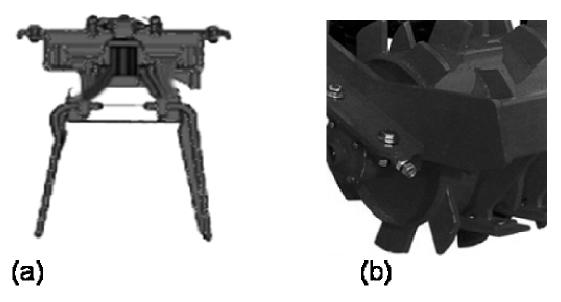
Blades and cylinder gears of vertical-blade rotating dredge
